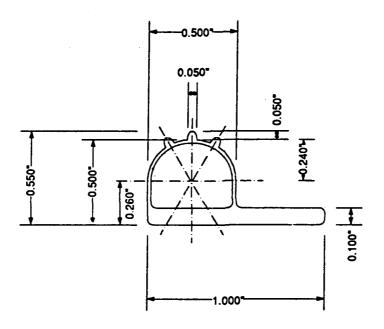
CROSS-SECTION OF GEL-TYPE SEAL
